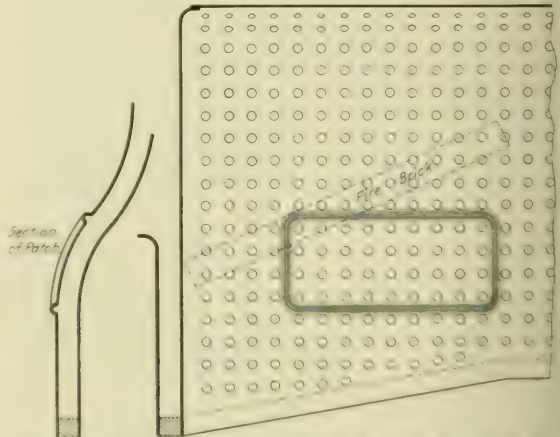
Showing Patch Welded on Firebox Before U Was Hammered Down.
